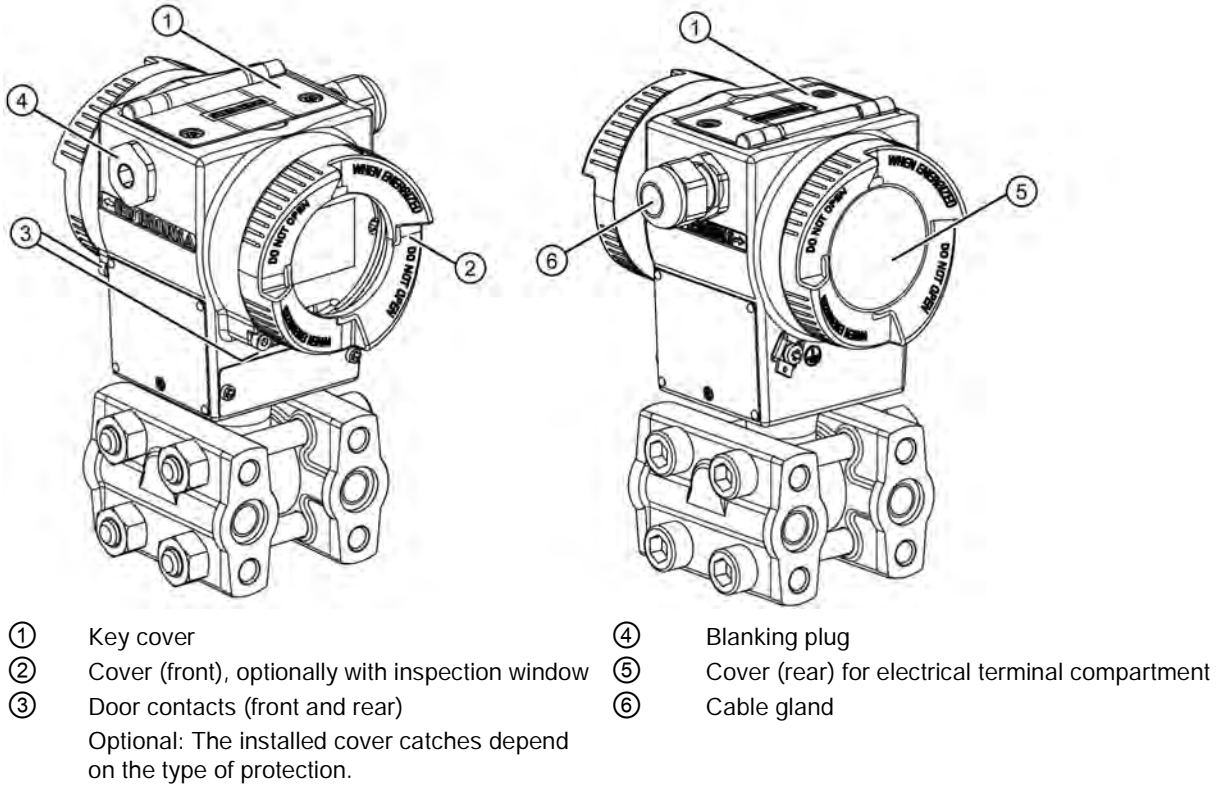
View of the pressure transmitter: Left: Front right: View from rear
